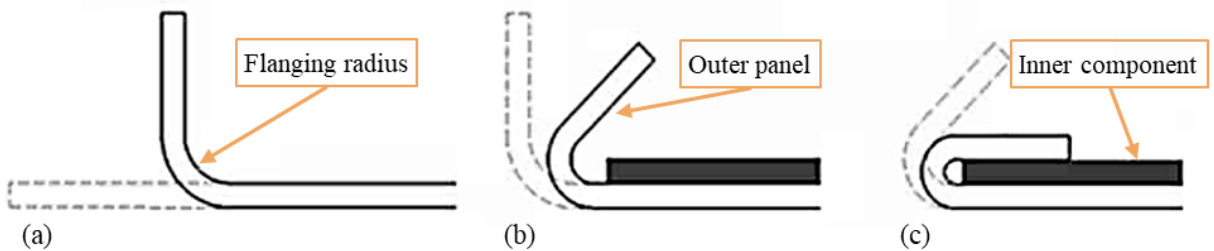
Bonding of outer and inner panels through hemming in 3 steps: (a) flanging, (b) pre-hemming and (c) hemming [33]
